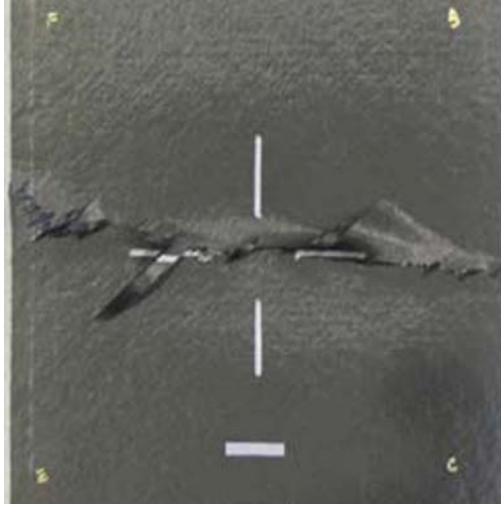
Photograph of a typical end-loaded compression after impact specimen.
